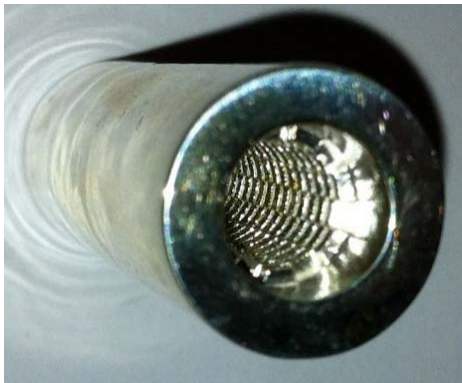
Cylindrical PSL manufactured using 3D printing.
